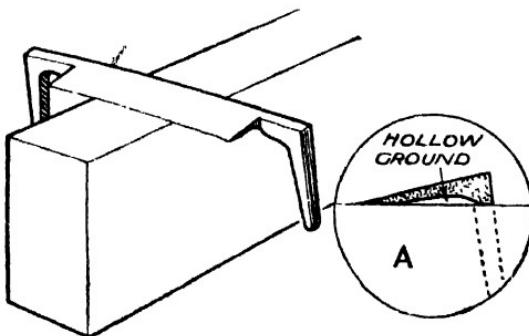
SHARPENING SPOKESHAVE CUTTER.
